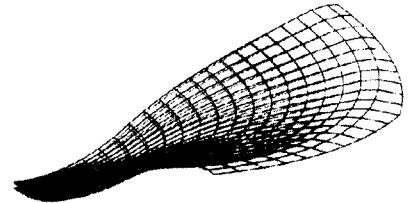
Deformed shape before and after unloading (before cutting) at the punch stroke of 20.32 mm
